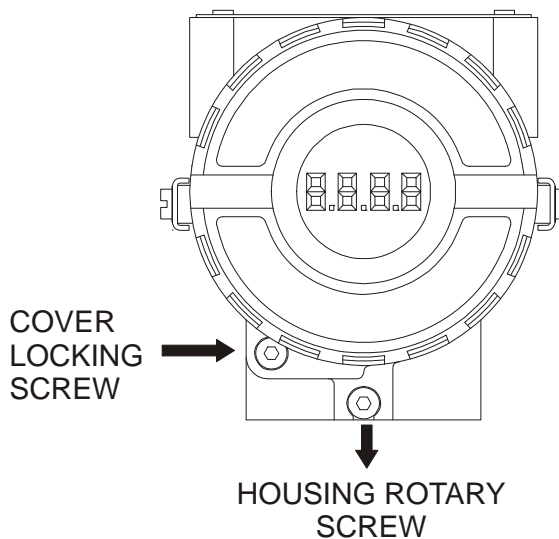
Cover Locking and Housing Rotation Set Screw
